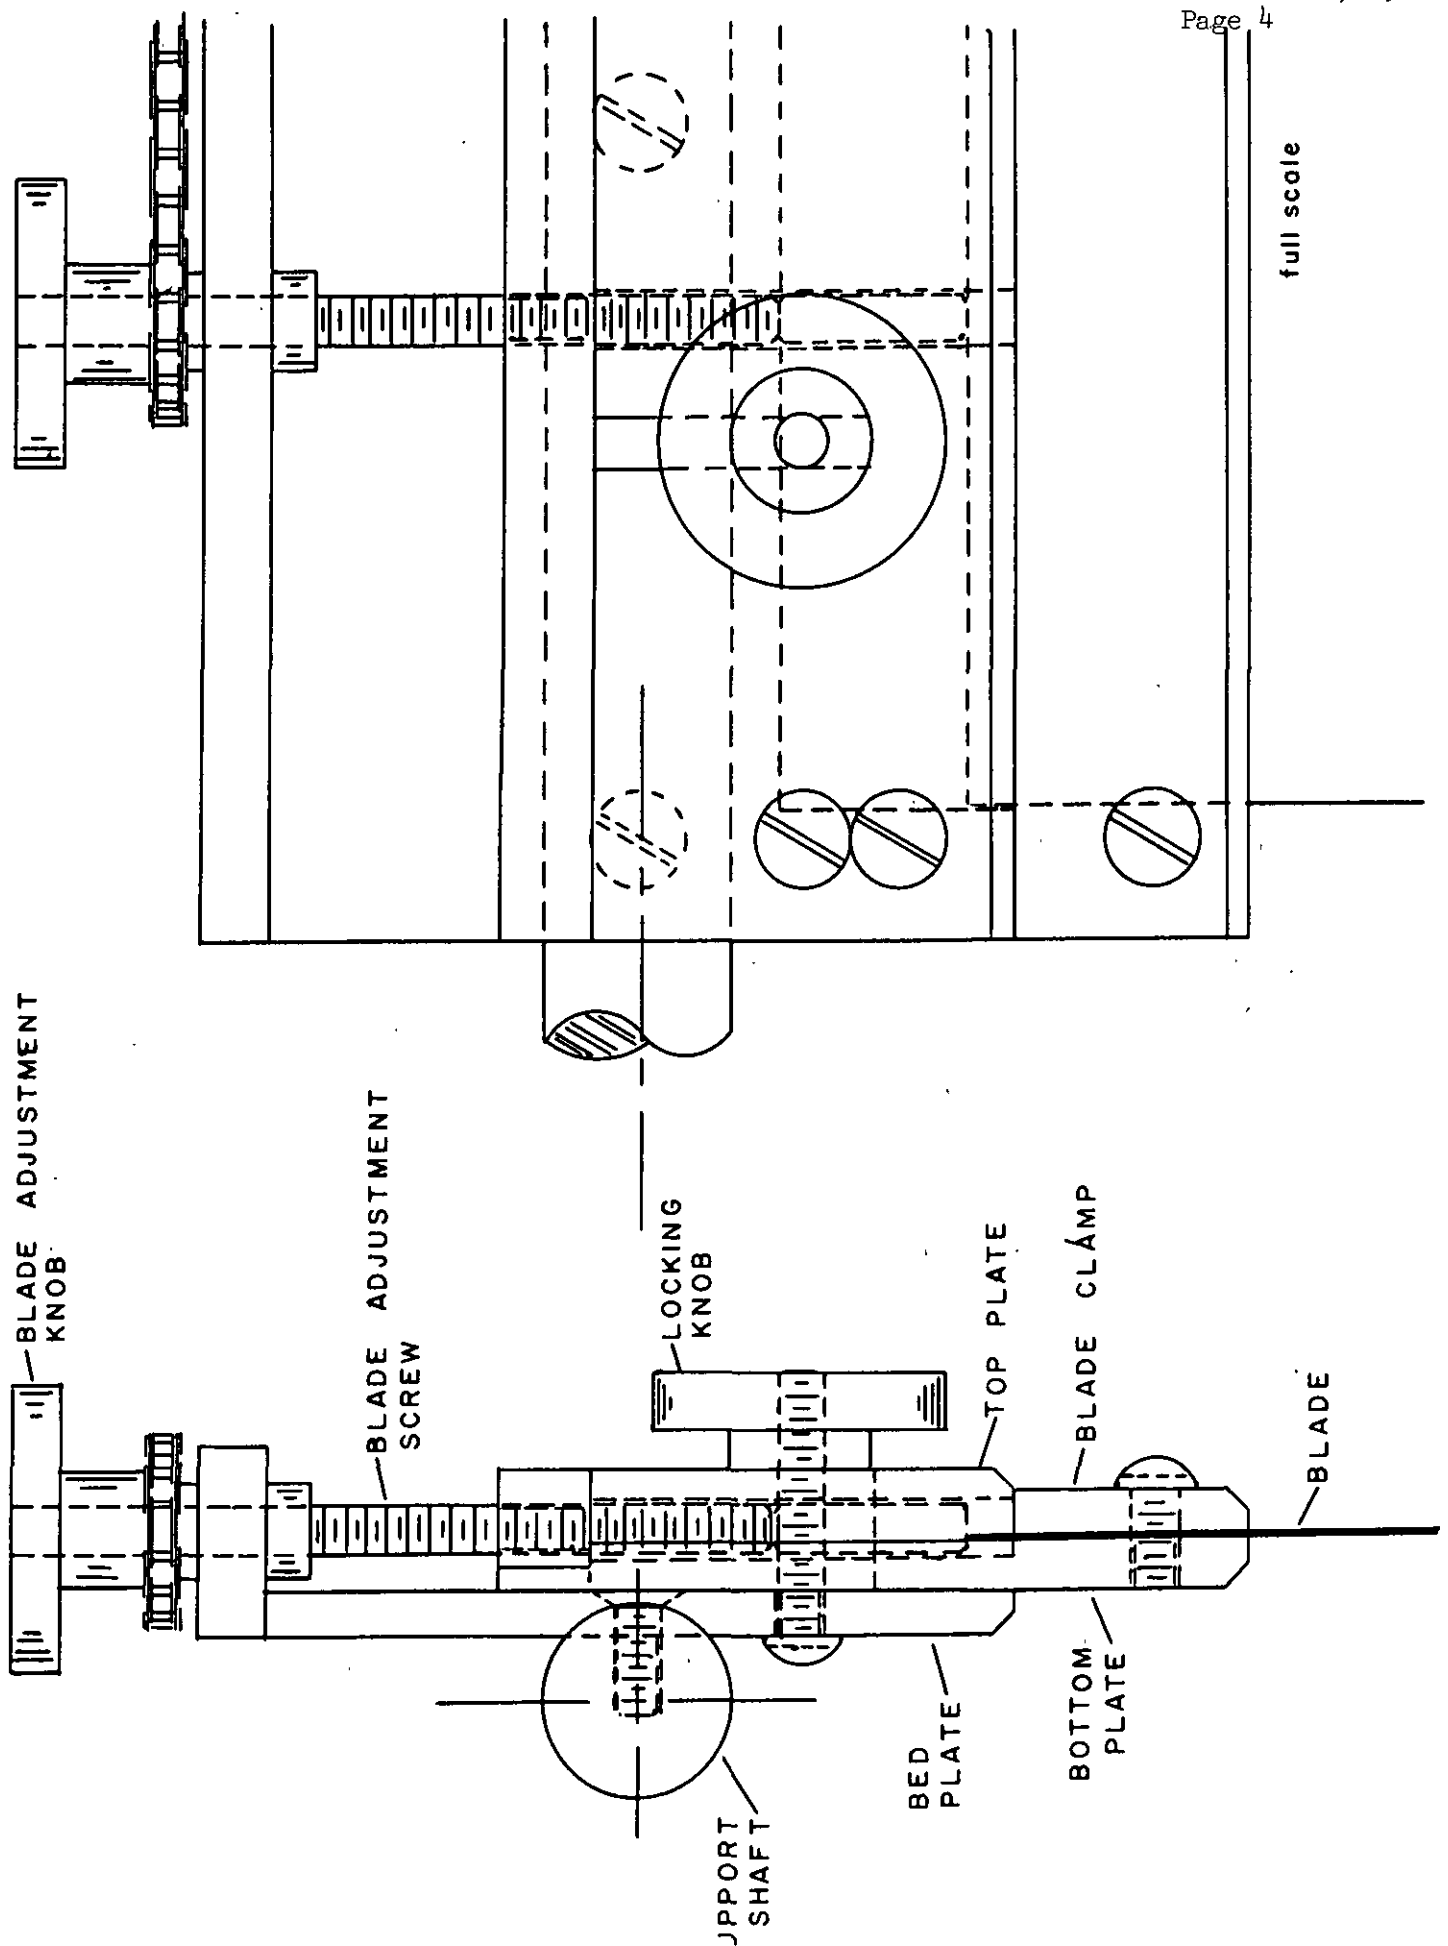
Side and Top Views of Blade Holder Showing Blade Adjusting Screw
